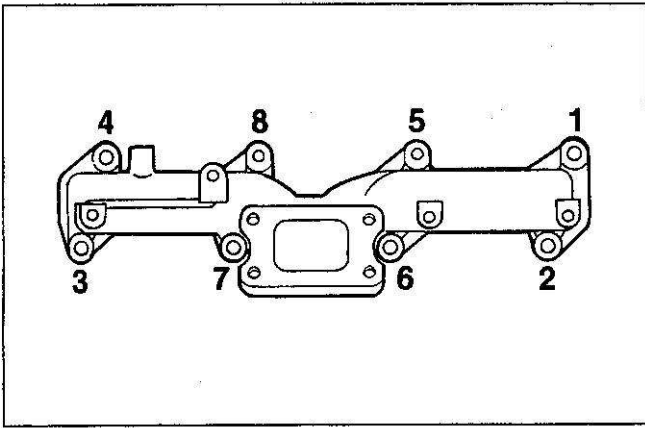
Exhaust Manifold Bolt Loosening Sequence
